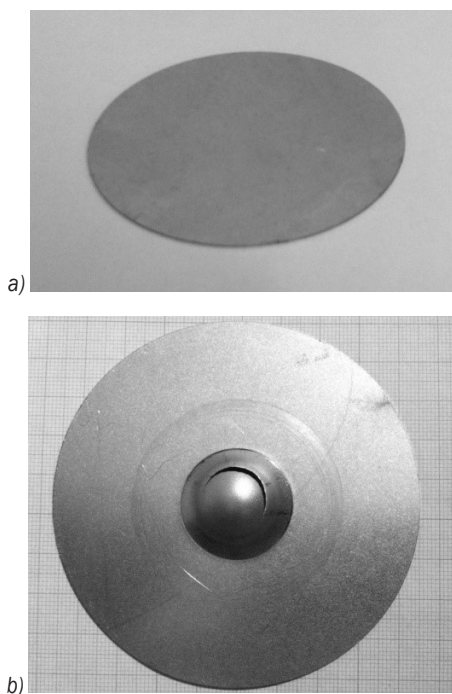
Photographs of DC05 specimen used in Erichsen test; a) undeformed specimen, b) deformed specimen
